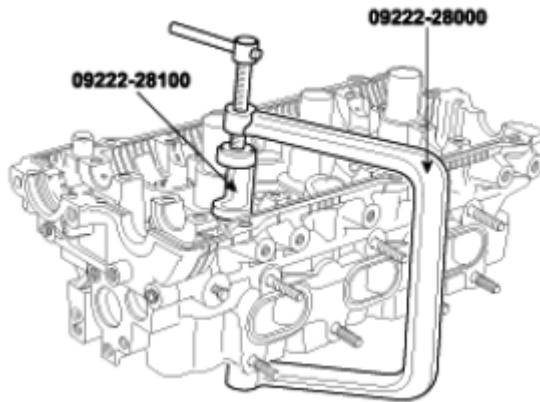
Removing Valves Using SST (09222-28000, 09222-28100)
